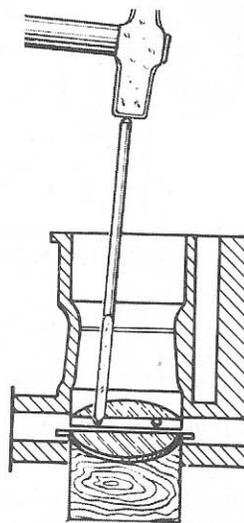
Peening the throttle valve retaining screws (Sec 7)
